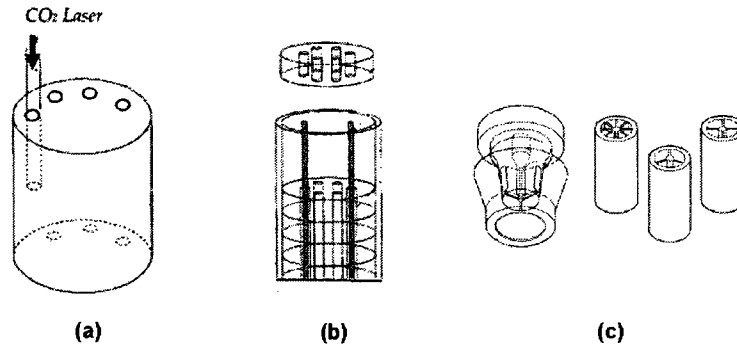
Preform fabrication methods: (a)  $CO_2$  laser drilling; (b) stacking disks; (c) extrusion
